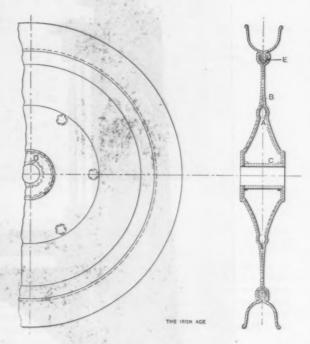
Details of Construction of the Larger Sizes of Sheaves.
